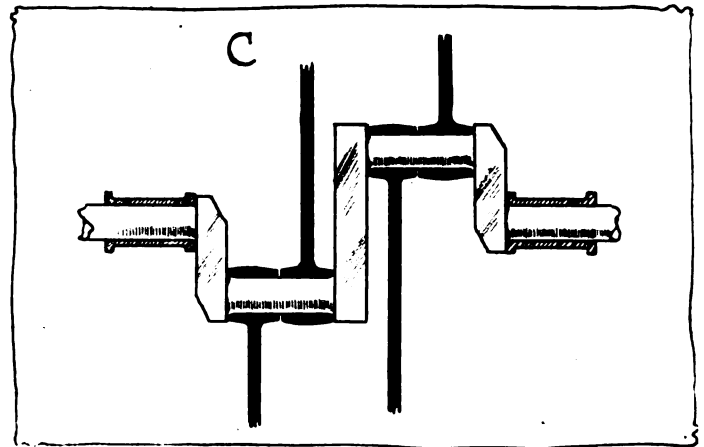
More compact form of crankshaft which could be used for opposed motor
